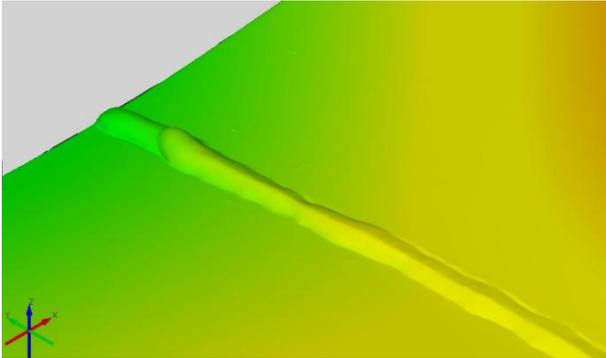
The weld bead connection close-up on weldment fabricated by manual GMAW
